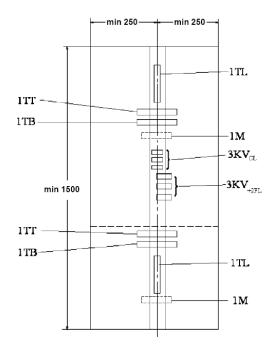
1 Butt weld test assembly for the approval of electric-slag and gaselectric welding. Symbols for testing assemblies shall meet 4.9.2.3 (all dimensioned in mm unless specified otherwise)
